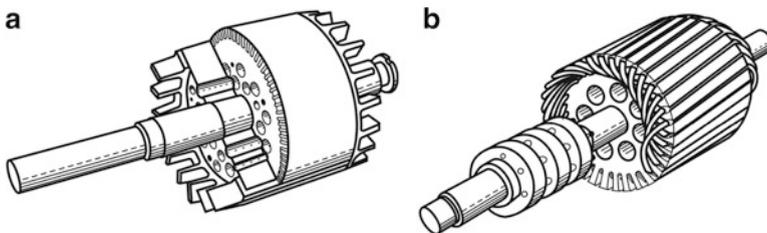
(a) Cage rotor. (b) Wound rotor with slip rings
